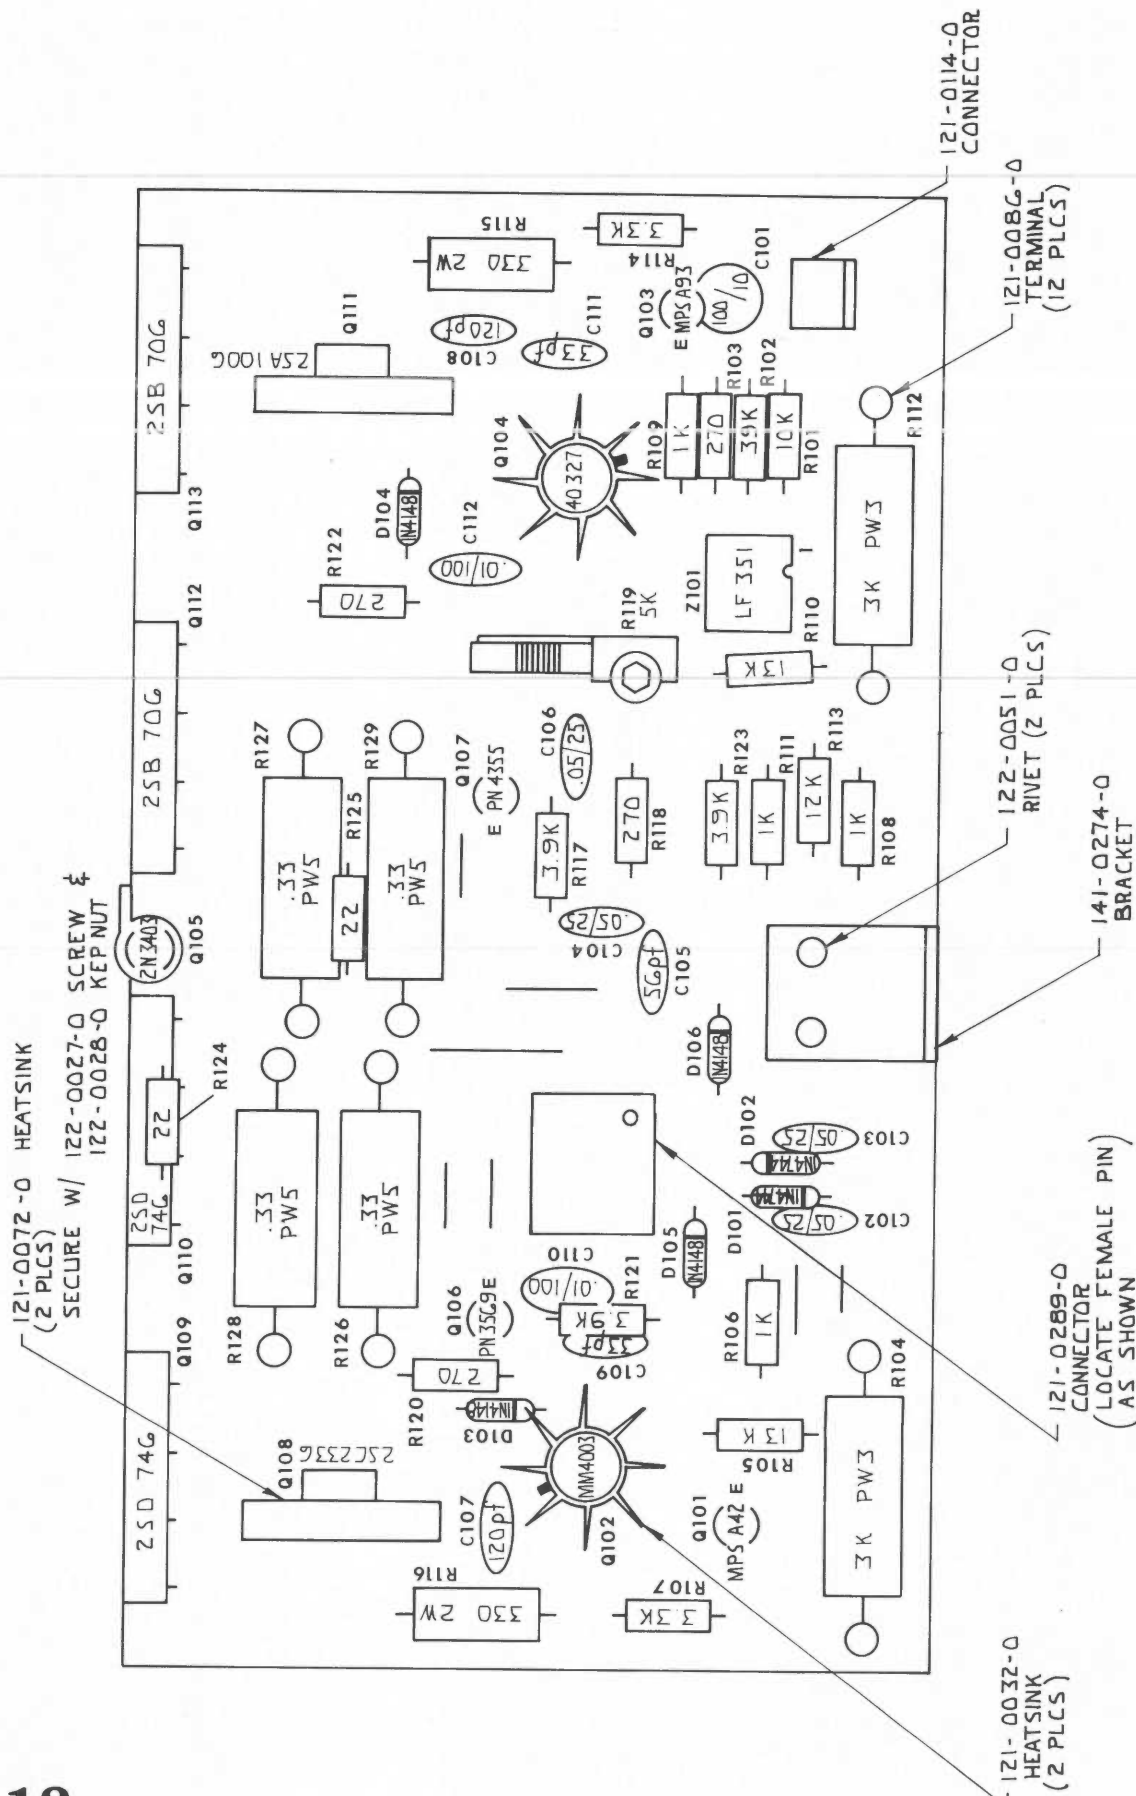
Assembly Diagram, A30 Drive PCB
